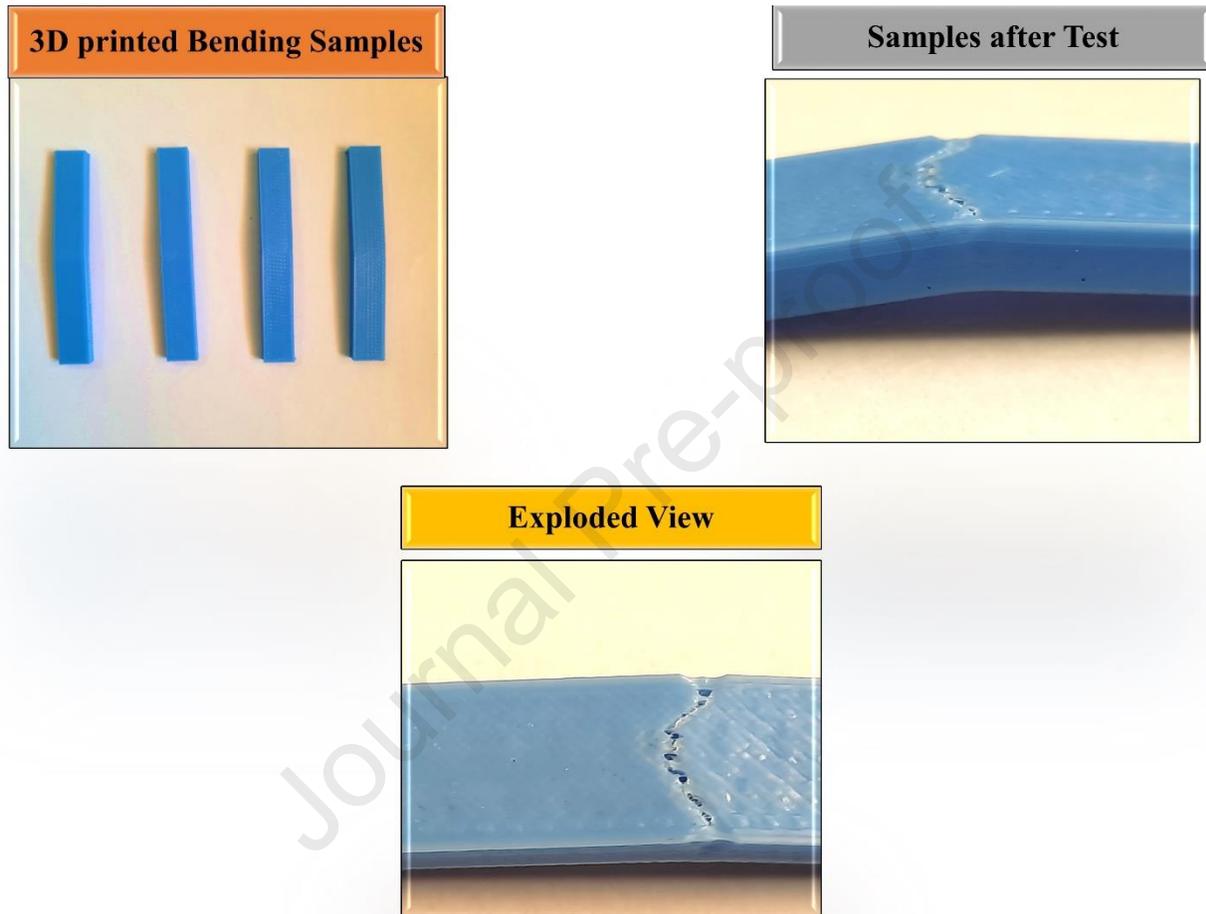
3D Printed Samples for bending test (Before and after the test)
